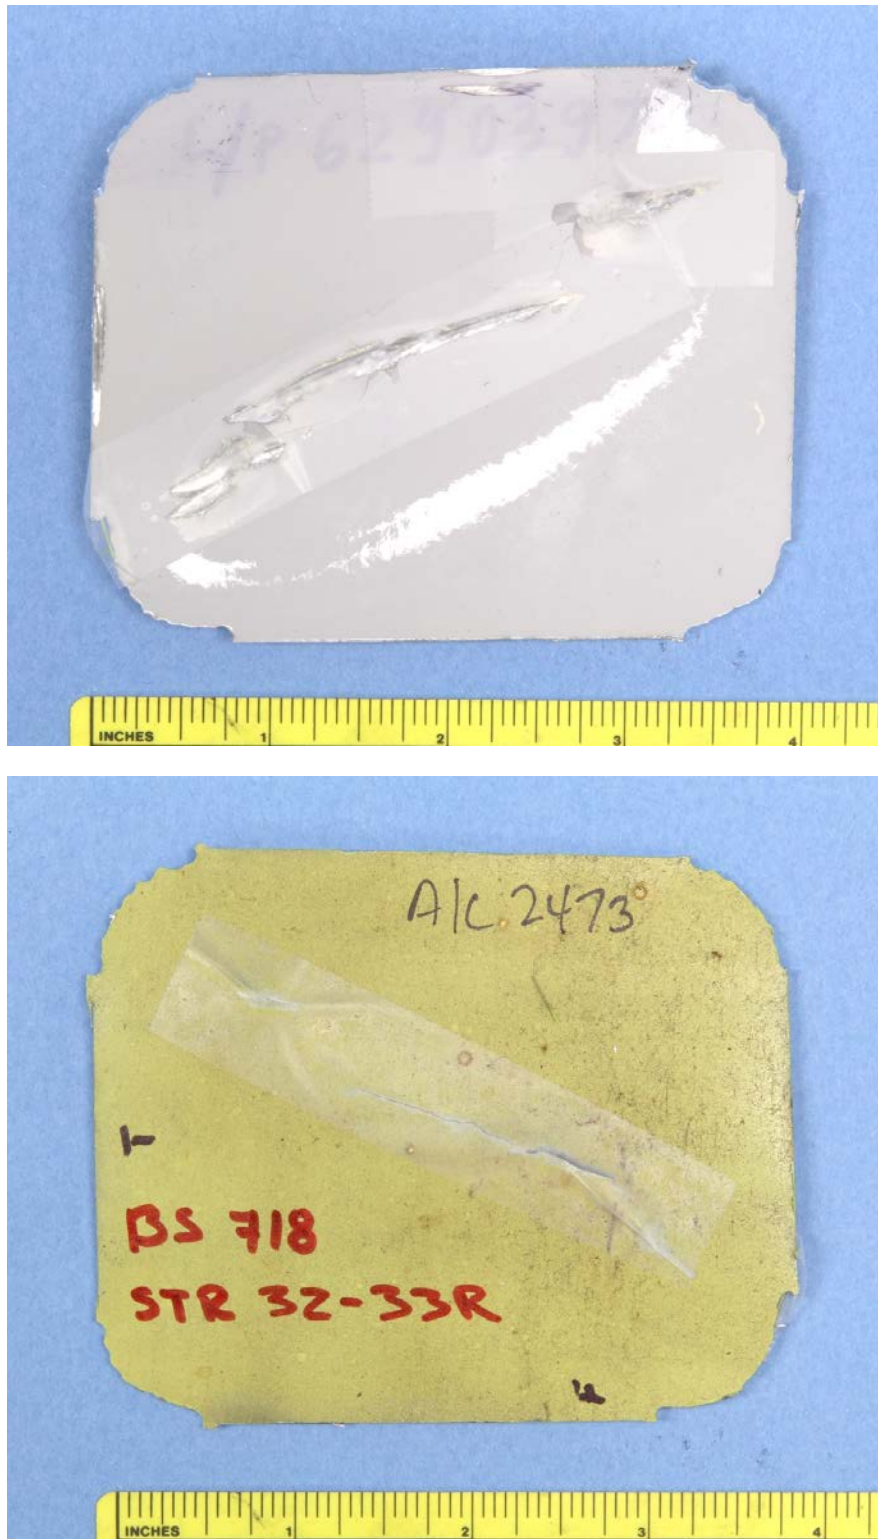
Overall photos of the unattached piece of fuselage. The top photo shows impact marks on the painted external surface of the piece.
